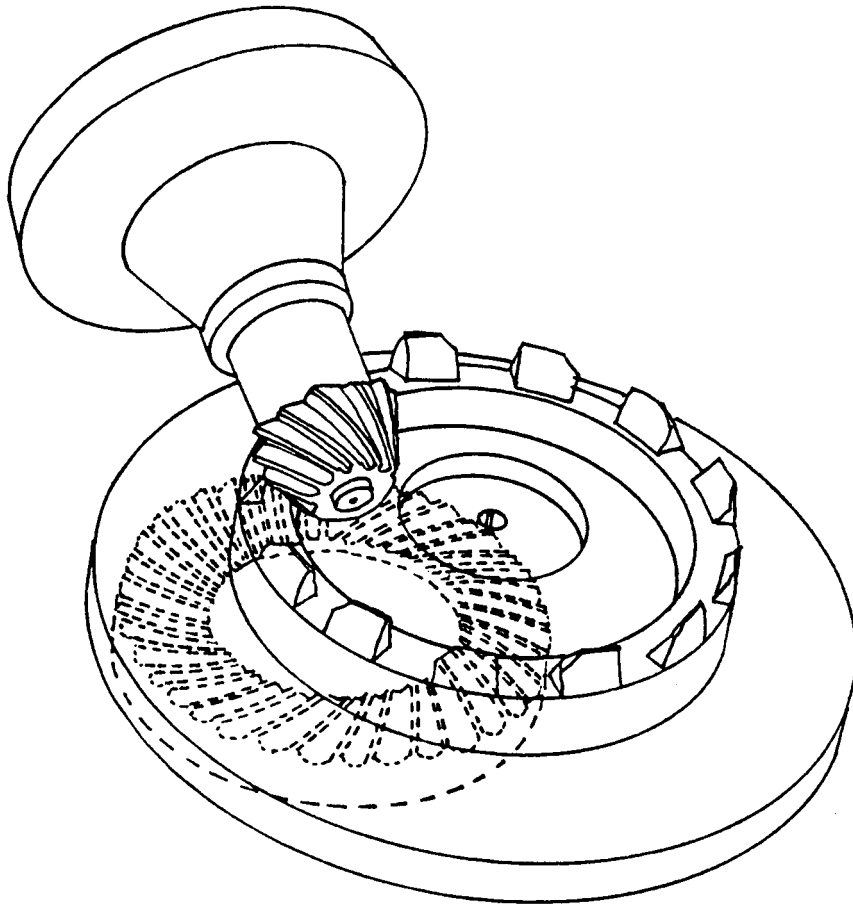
Face-Mill Cutter Is The Generating Gear
